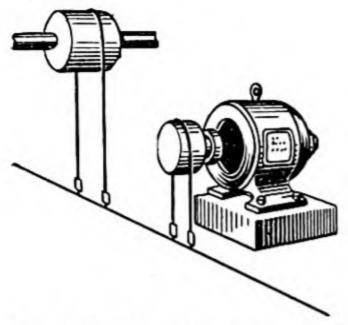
Aligning motor shaft for parallelism with follower pulley shaft in belt drive when the width of pulleys differs.
